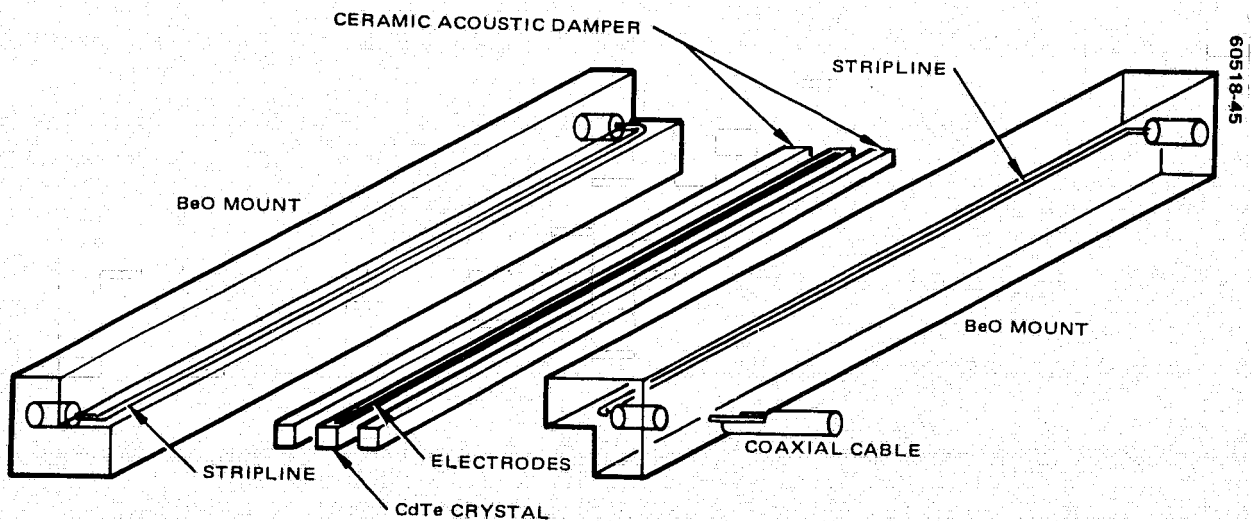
EXPLODED VIEW OF STRIPLINE TRANSMISSION LINE MODULATOR ASSEMBLY
